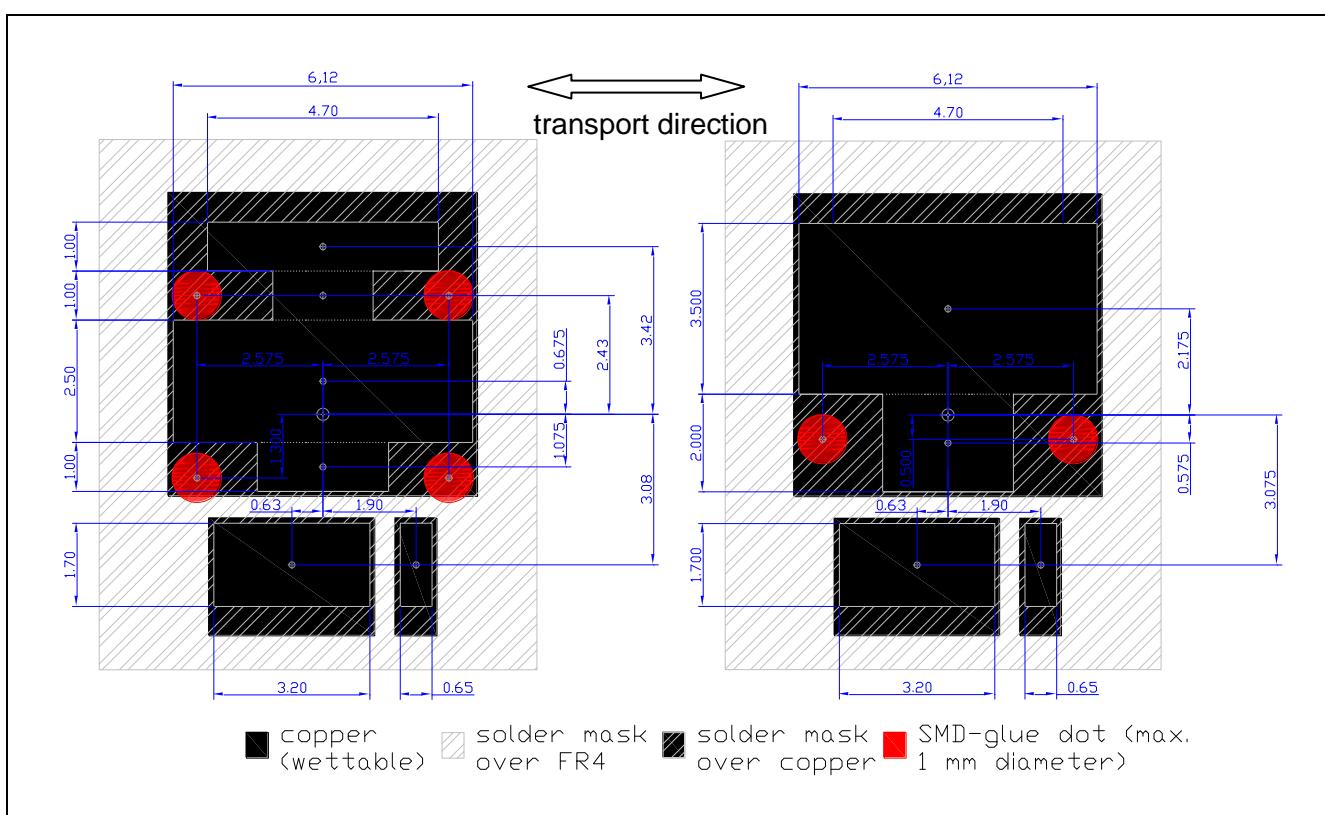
PCB pad designs for wave soldering of SuperSO8; left side: 4-dot version; right side: 2-dot version
